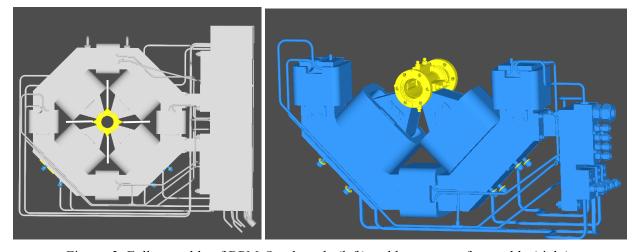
Full assembly of BPM-Quadrupole (left) and lower part of assembly (right).
